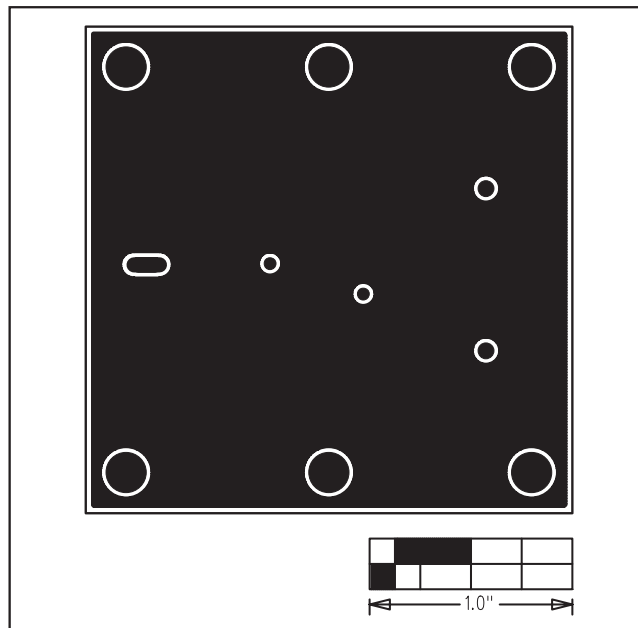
MAX9532 EV Kit PCB Layout—Solder Side
